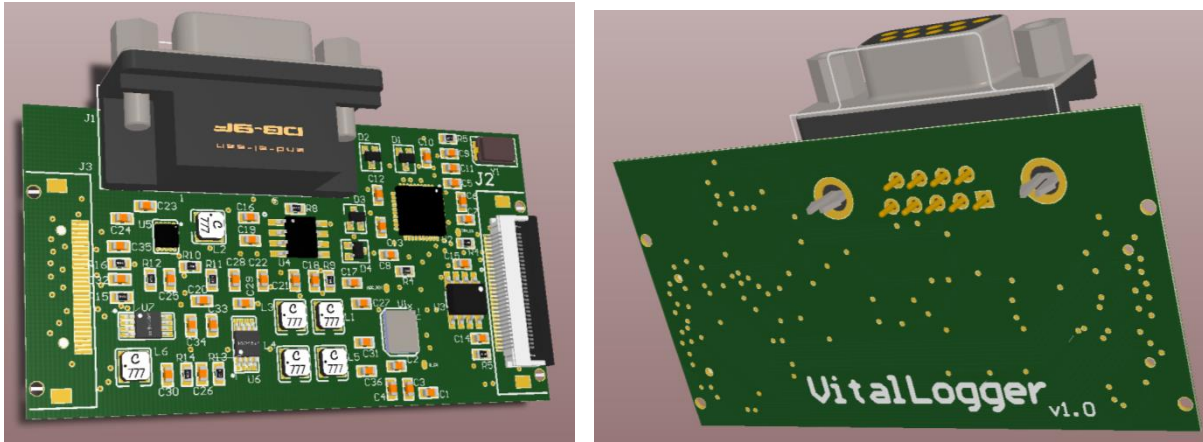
3D model of the VitalLogger extension board first prototype. The left image shows the top view of the prototype and the right image the bottom view.
